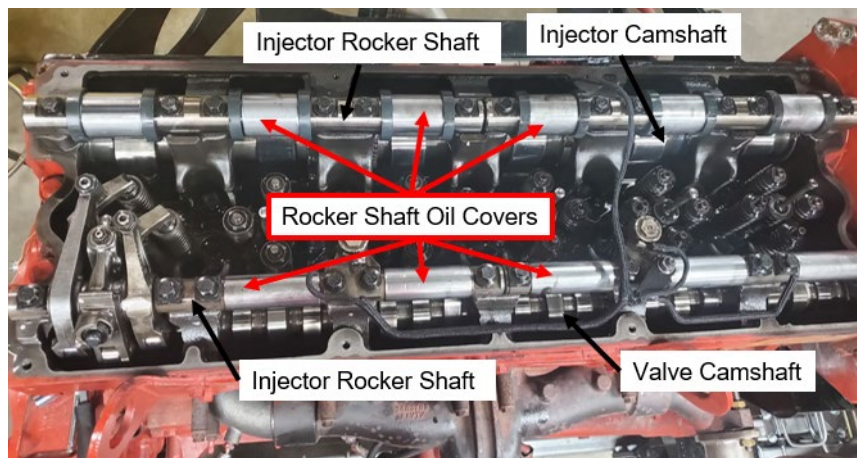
Injector and Valvetrain Rocker Shaft Oil Covers
